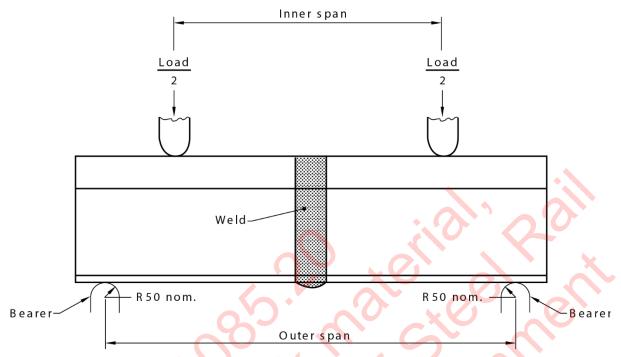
Typical testing assembly for foot fatigue test (note r = Radius)
